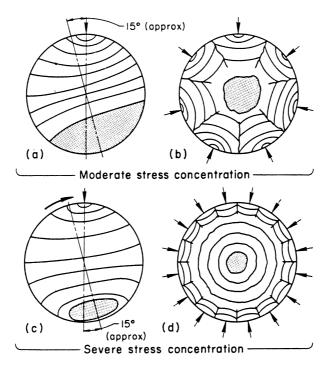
Schematics of fatigue failure fracture surfaces in rotating bending.
